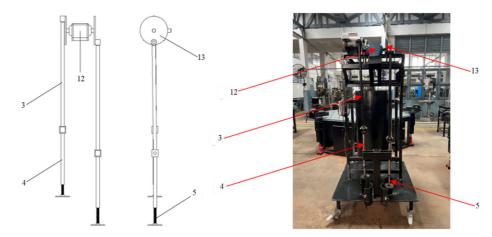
Pressing unit of semi-automatic split-gill mushroom spawn mixing and pressing machine
